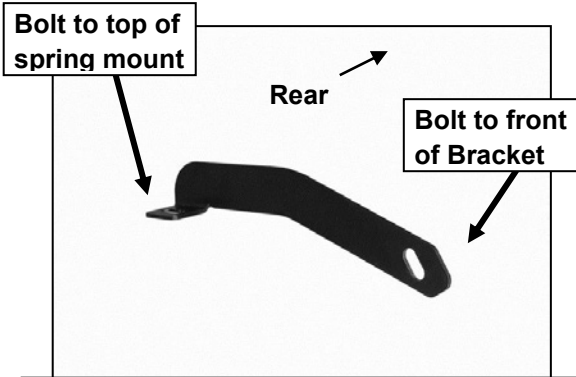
2011-15 Driver side bed Mounting Bracket Bolt Plate pictured
